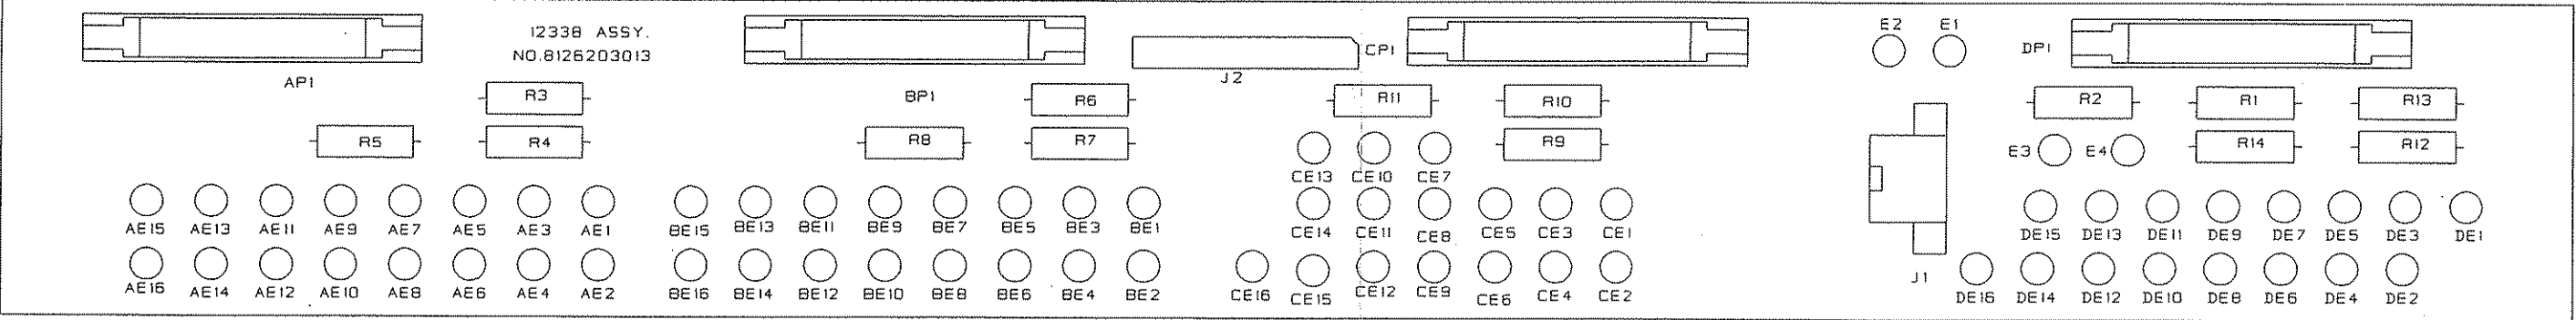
PC Assembly Connector Interface and Front Panel Assembly, page 1 of 2.
